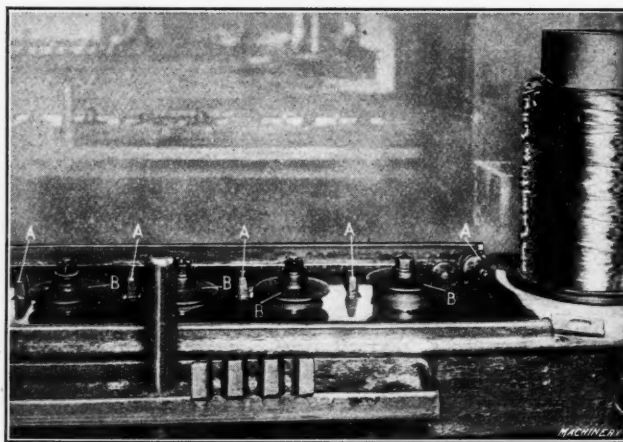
Part of a Continuous Wire Drawing Machine for Finer Sizes of Wire
